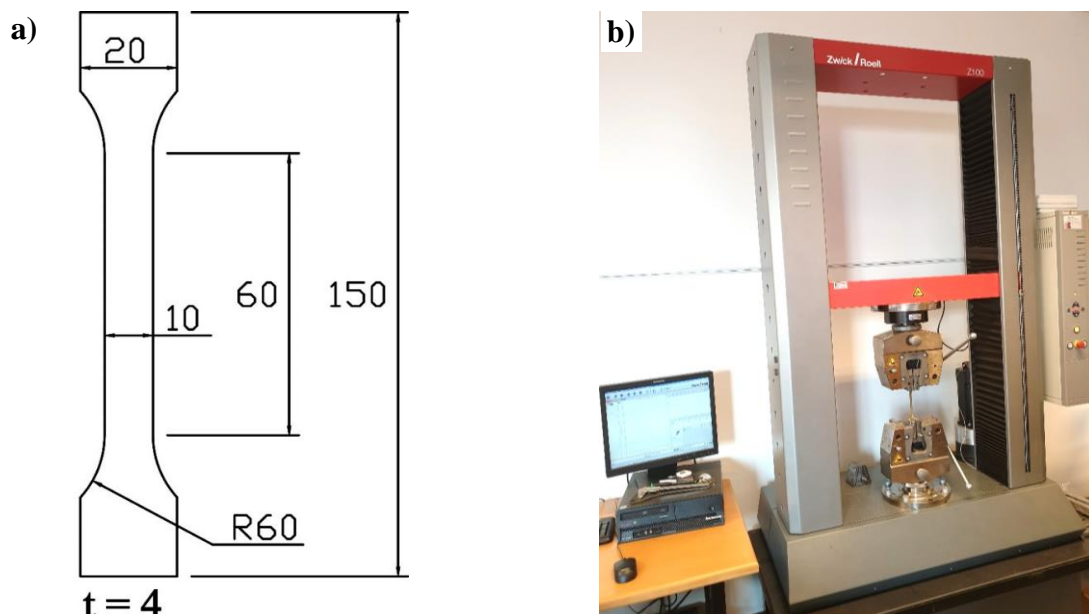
Mechanical tests sample and apparatus, a) dimensions of the dog-bone tensile test piece (ISO 527-2, type 1B, FDM printed), and b) tensile testing machine used
